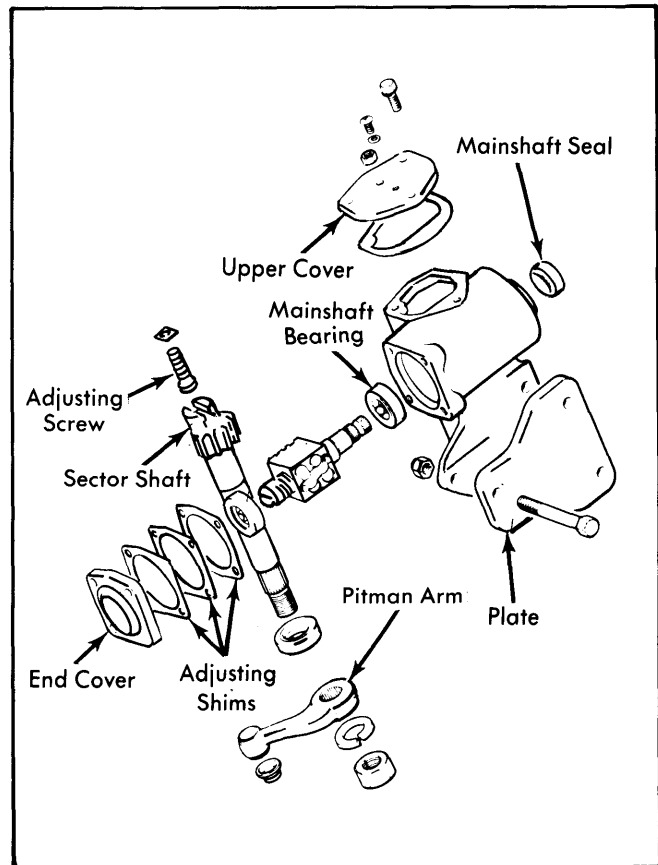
Exploded View of Recirculating Ball & Nut Steering Gear — 2000 cc Engine
